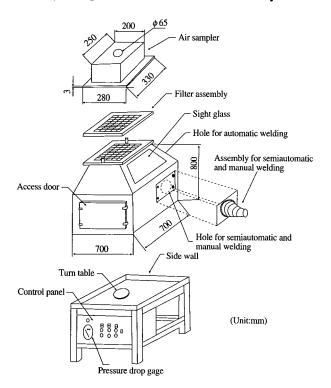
Schematic drawing of the fume collection chamber constructed which has the capability of the exact control of welding conditions and can be worked with manual, semiautomatic and automatic welding processes
